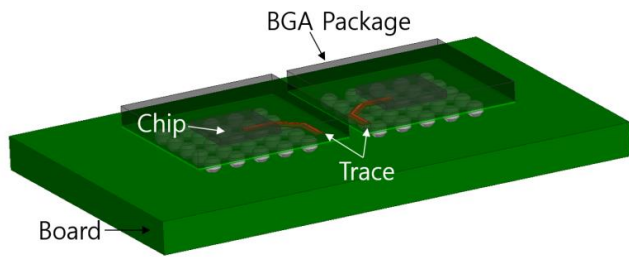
BGA Package Structure and Its Arrangement on PCB for Electromagnetic Coupling Calculation.
